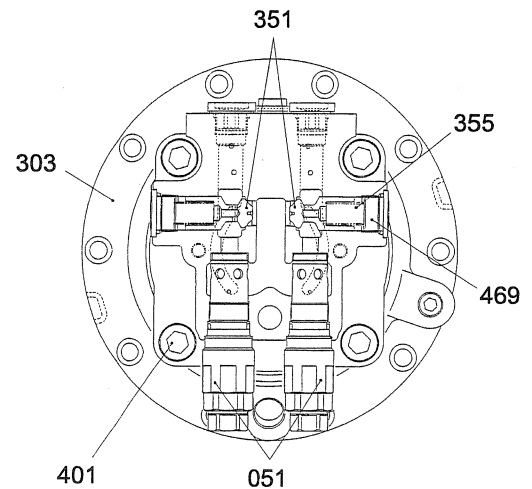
Removing relief valve (651), anti-reaction valve (052), anti-cavitation plunger (351) and valve casing (303)
